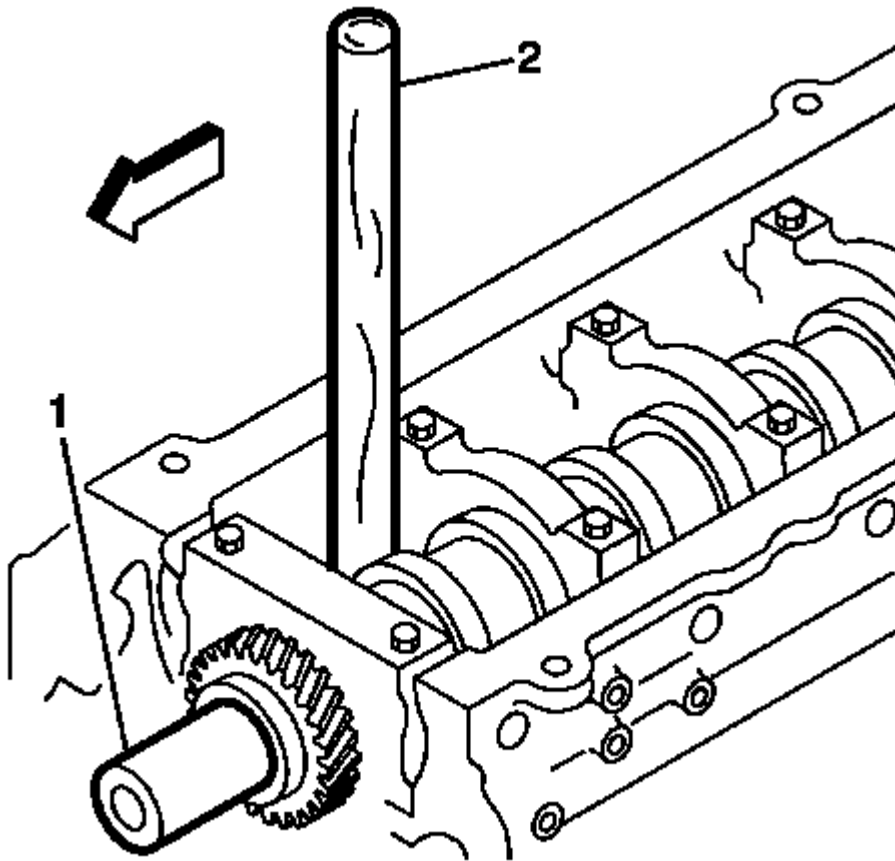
Blocking Crankshaft From Turning Using Wooden Handle
